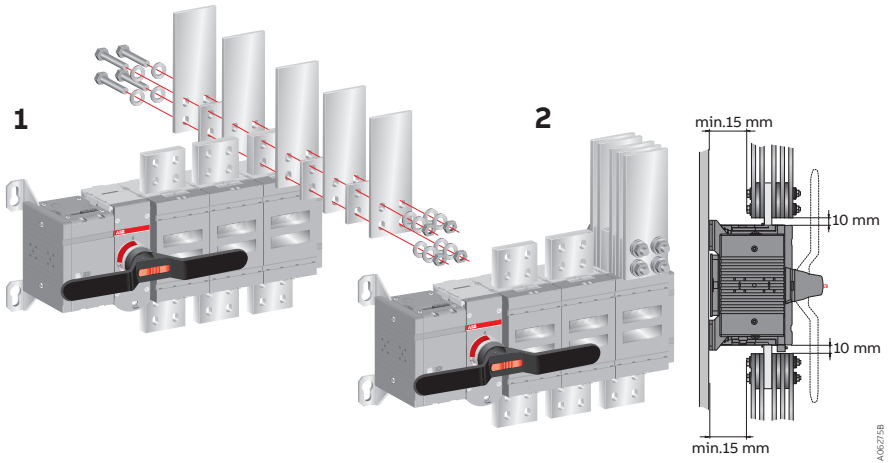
Mounting the connections to the motorized change-over switches OTM4000
